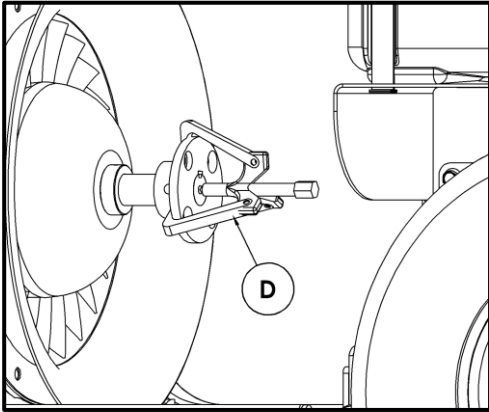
3-Jaw Puller on Turbine Coupling Flange
